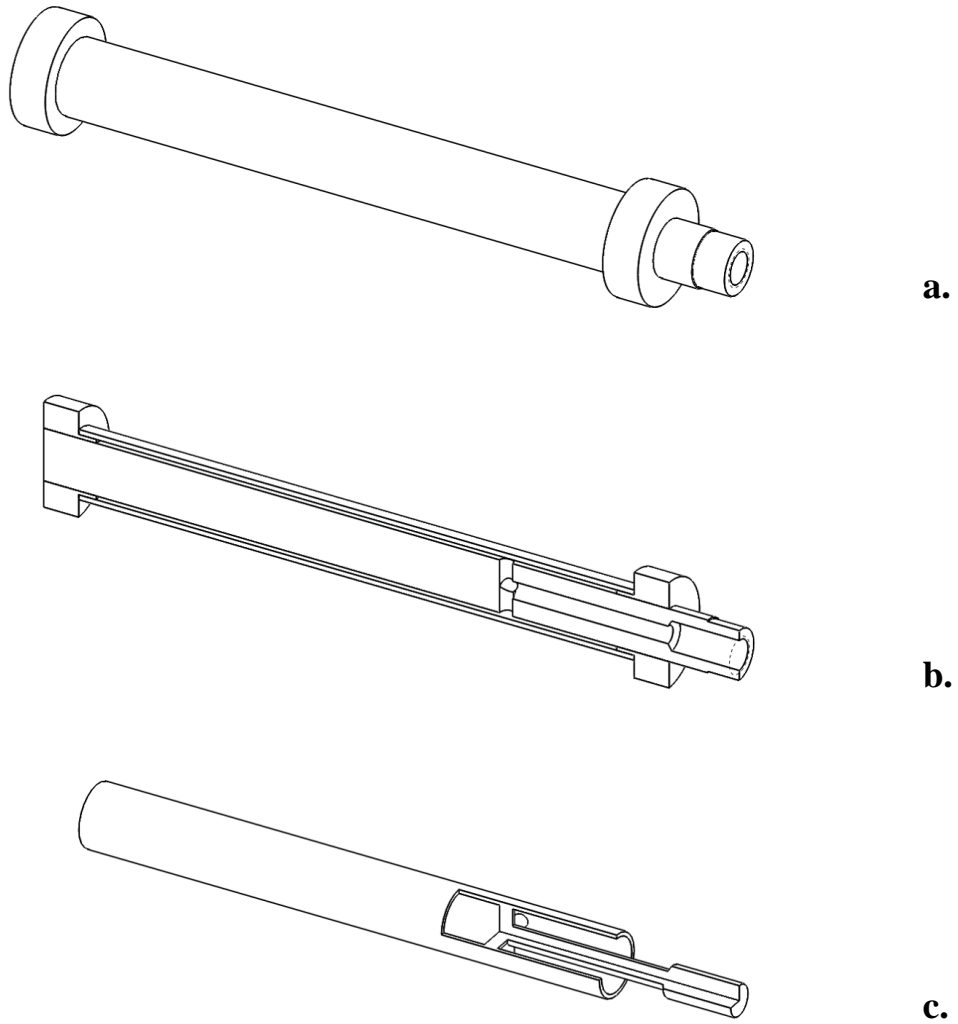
a. 3D CAD rendering of the assembled simulated blood vessel mold, b. a cross section view of said mold, and c. 3D CAD rendering of the molded vessel with cutaway view displaying the inner channel that flows elastomer resin into the annular region of the mold
